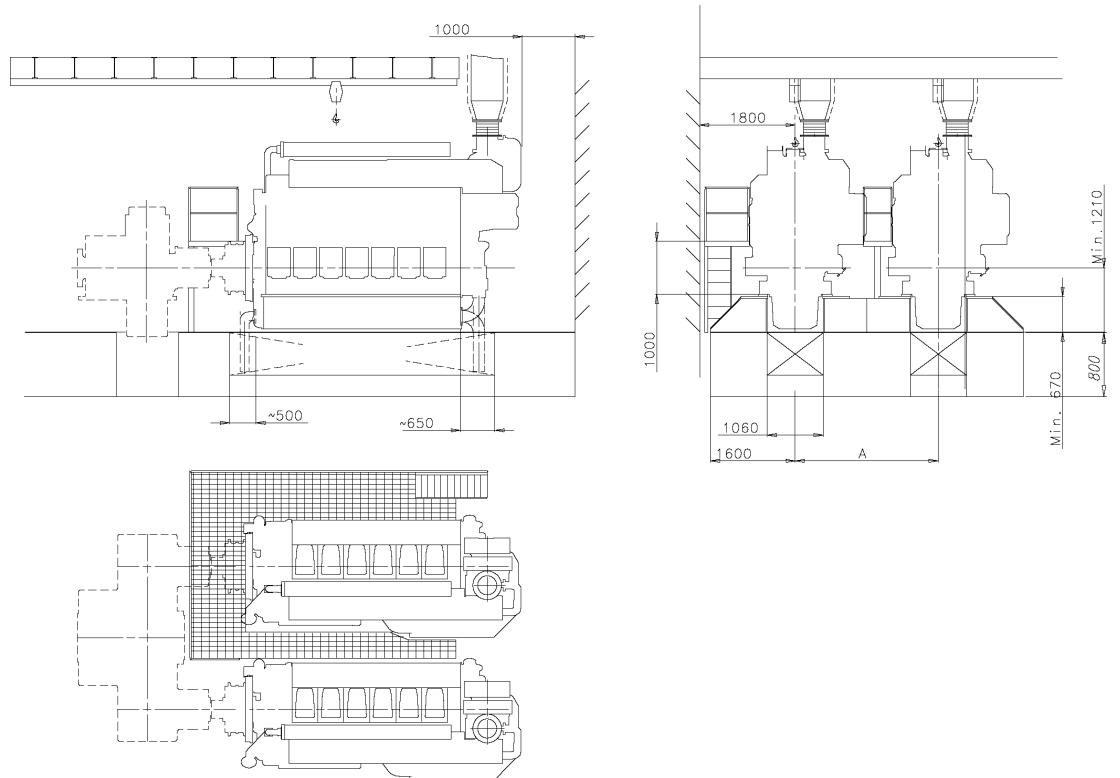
Crankshaft distances, in-line engines (DAAE082974B)
